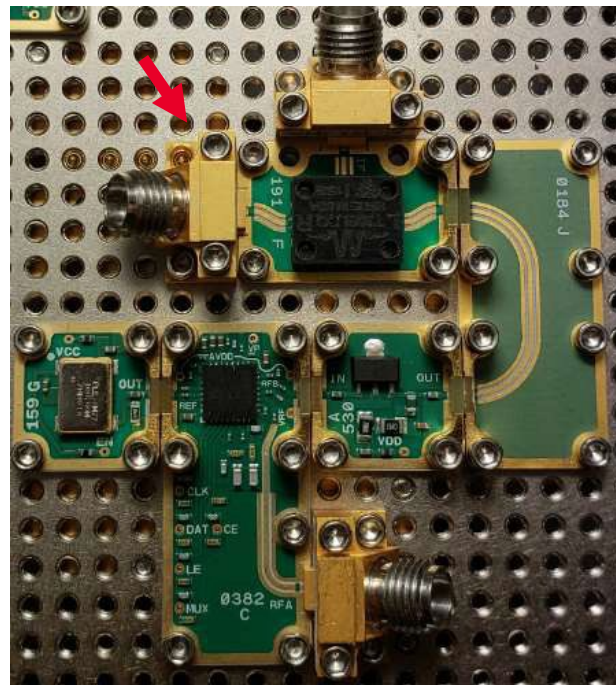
Installing the Marki T3 Mixer on the Plate. Leave out the fastener on upper left RF probe.
